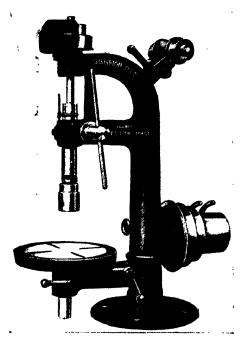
shows a machine of similar capacity, but direct driven, the maximum spindle speed in this case being 1,200 revs., the motor being 0.5 h.p. The distance from the centre of the spindle to the column is 6 in. In some cases the head is adjustable vertically on the column, giving a greater distance below the drill.
